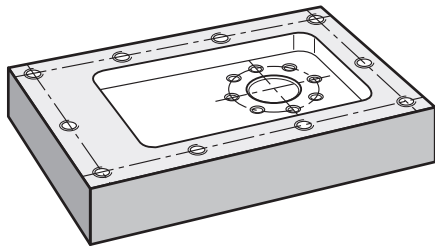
Example workpiece – drilling a bolt hole pattern and a row of holes
